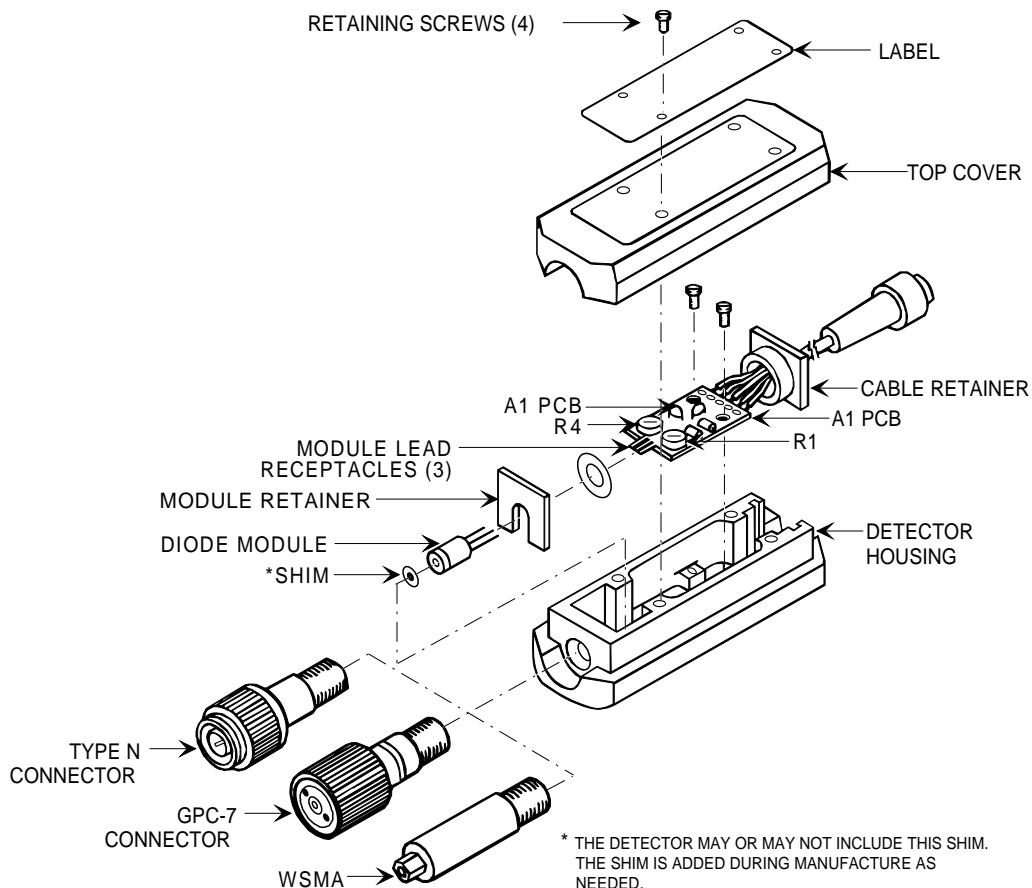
Series 560-7XXX RF Detectors, Exploded View
